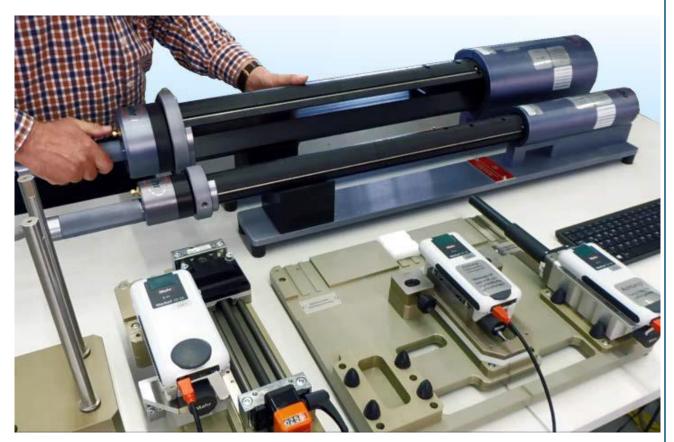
Support station for measuring heads for camshaft and crankshaft bearings, valve guides, plane of the vertical side of the crankshaft bearing, cylinder bore and the horizontal cylinder plane with calibration standards included.
